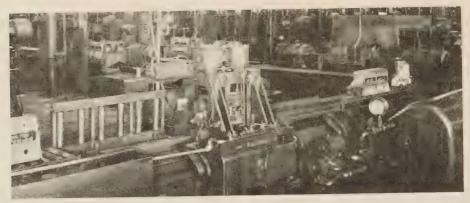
Horizontal Type, Hydraulically Operated Machine Broaching Bearing-Cap Slots
